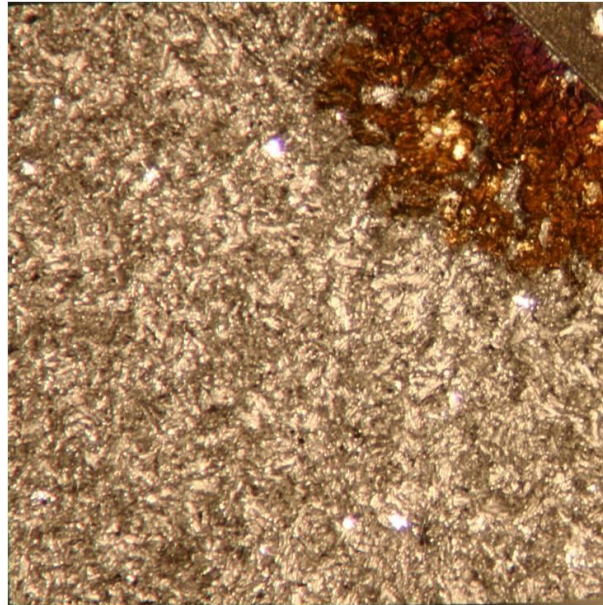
Optical microscopy image show the fracture surface of the broken test piece. The different shades of discolouration caused by oxidation indicate the fatigue and tensile fracture regions.
